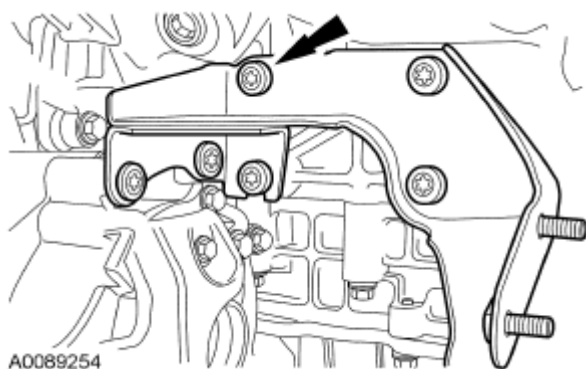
Locating Half Shaft Support Bracket & Bolts
